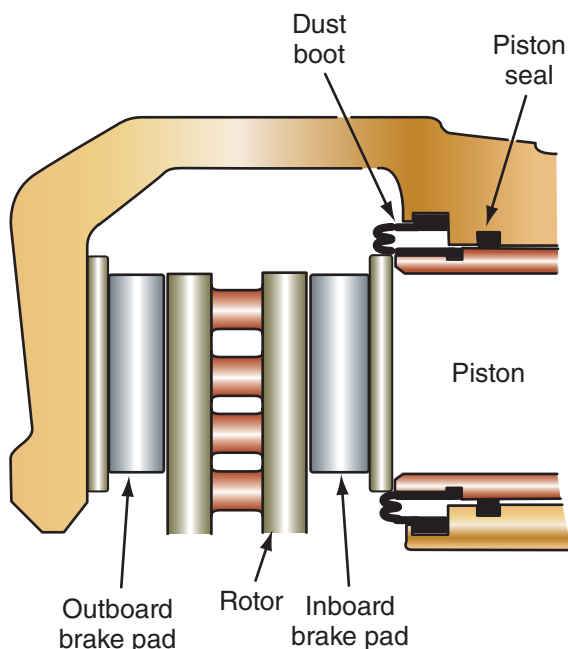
A view of how the disc brake caliper, pads, and rotor are arranged.
